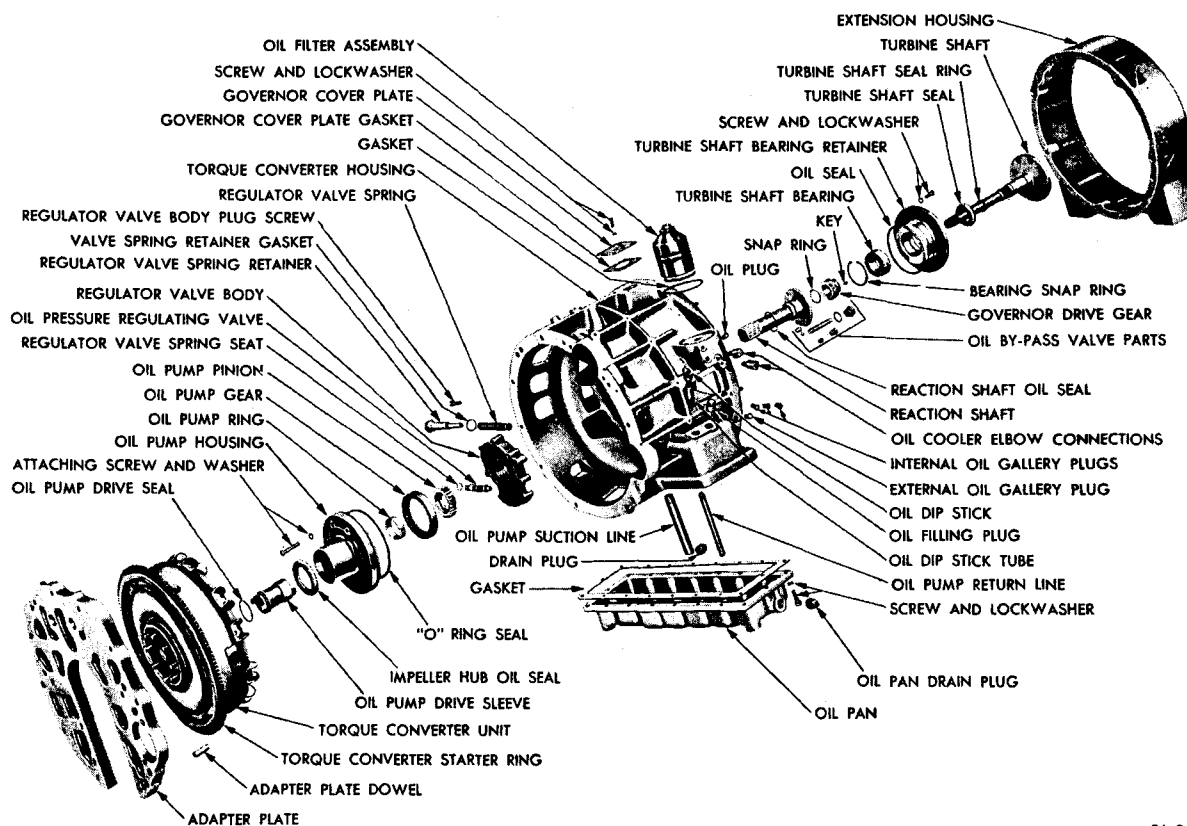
Torque Converter Housing Assembly (Disassembled View)
